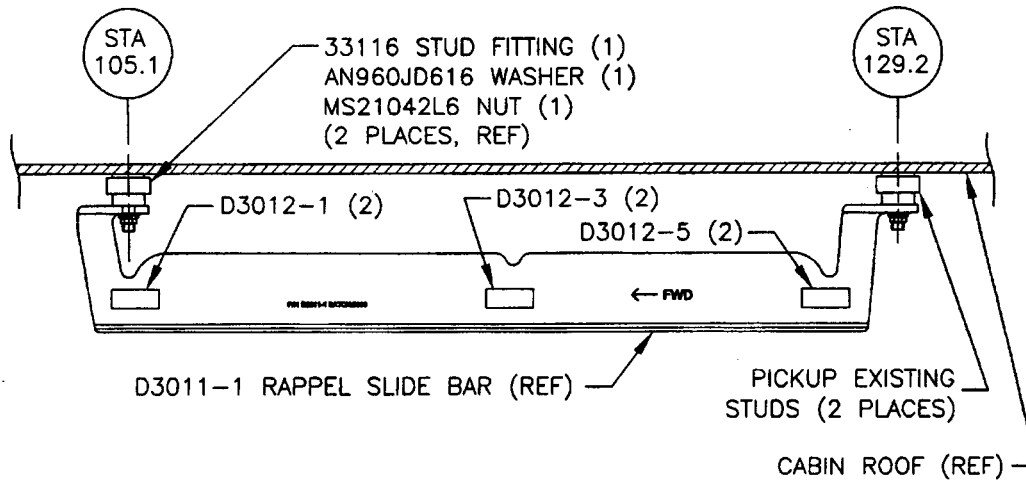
Installation of D205-523-043 Slide Bar Assembly
